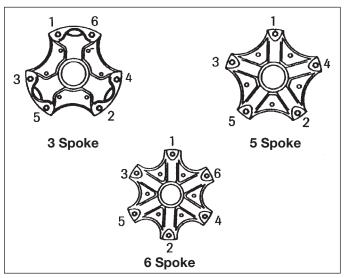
RIM/WHEEL TORQUE SEQUENCE
